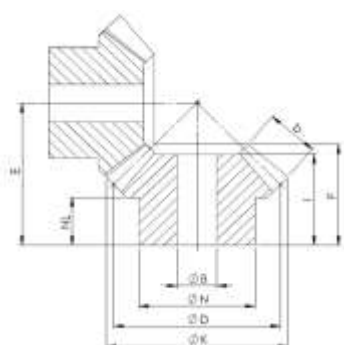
Bevel gear diagram found from seller of Bevel gears. Ebay
